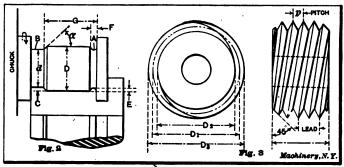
Preparing a Piece with a Fig. 22. Thread Roll with a Double Thread a Circular Form Tool —Note Beveled Edges
